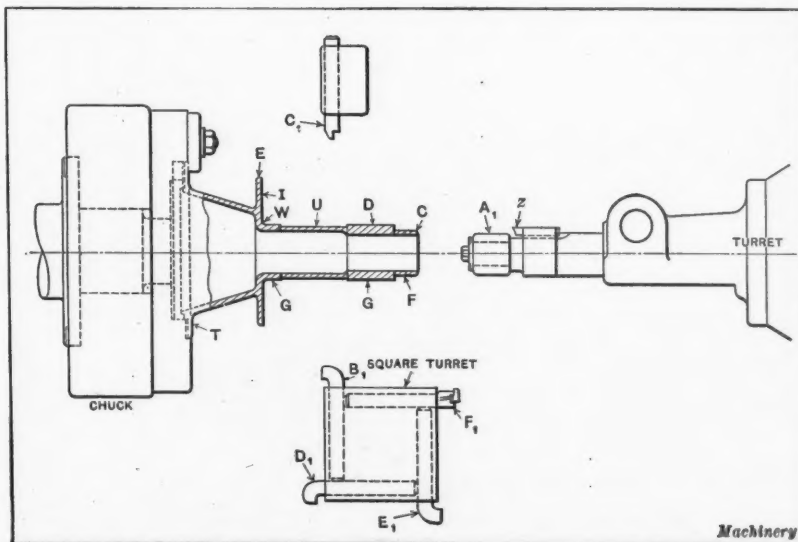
Equipment provided for performing the Final Operation on the Engine Nose-piece
